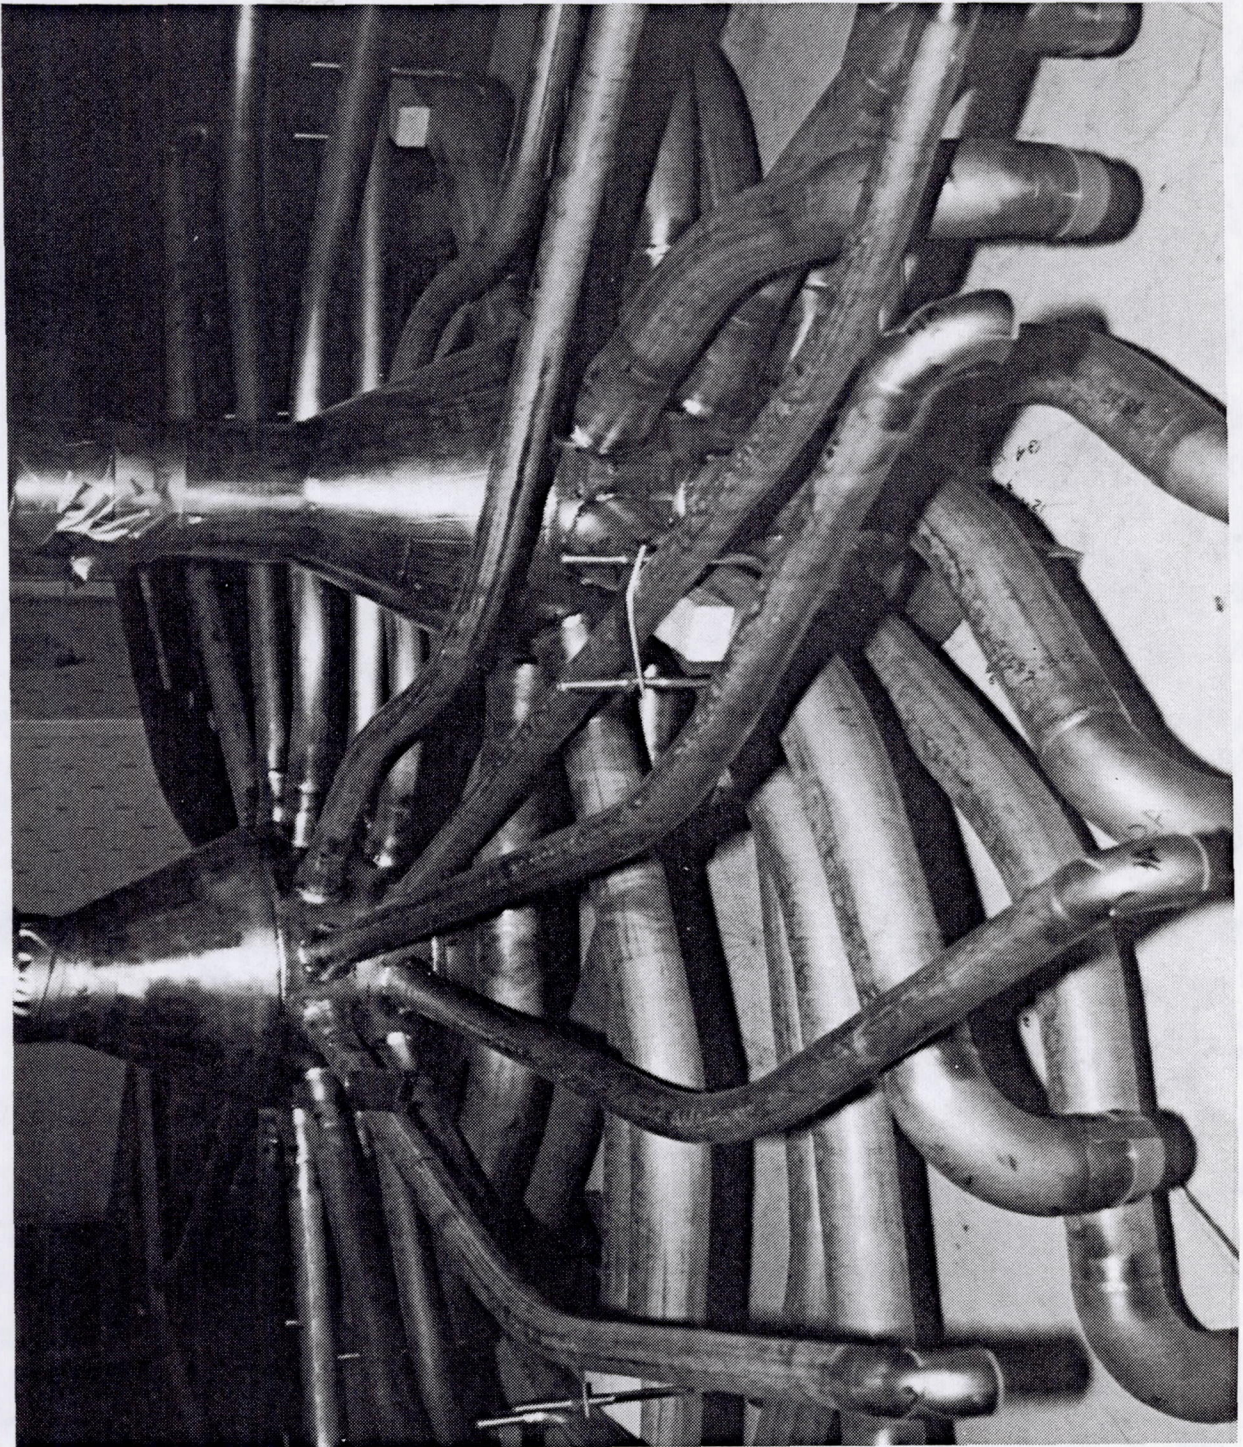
Layout Board Used to Align Radial Extension Arms on Plenums
